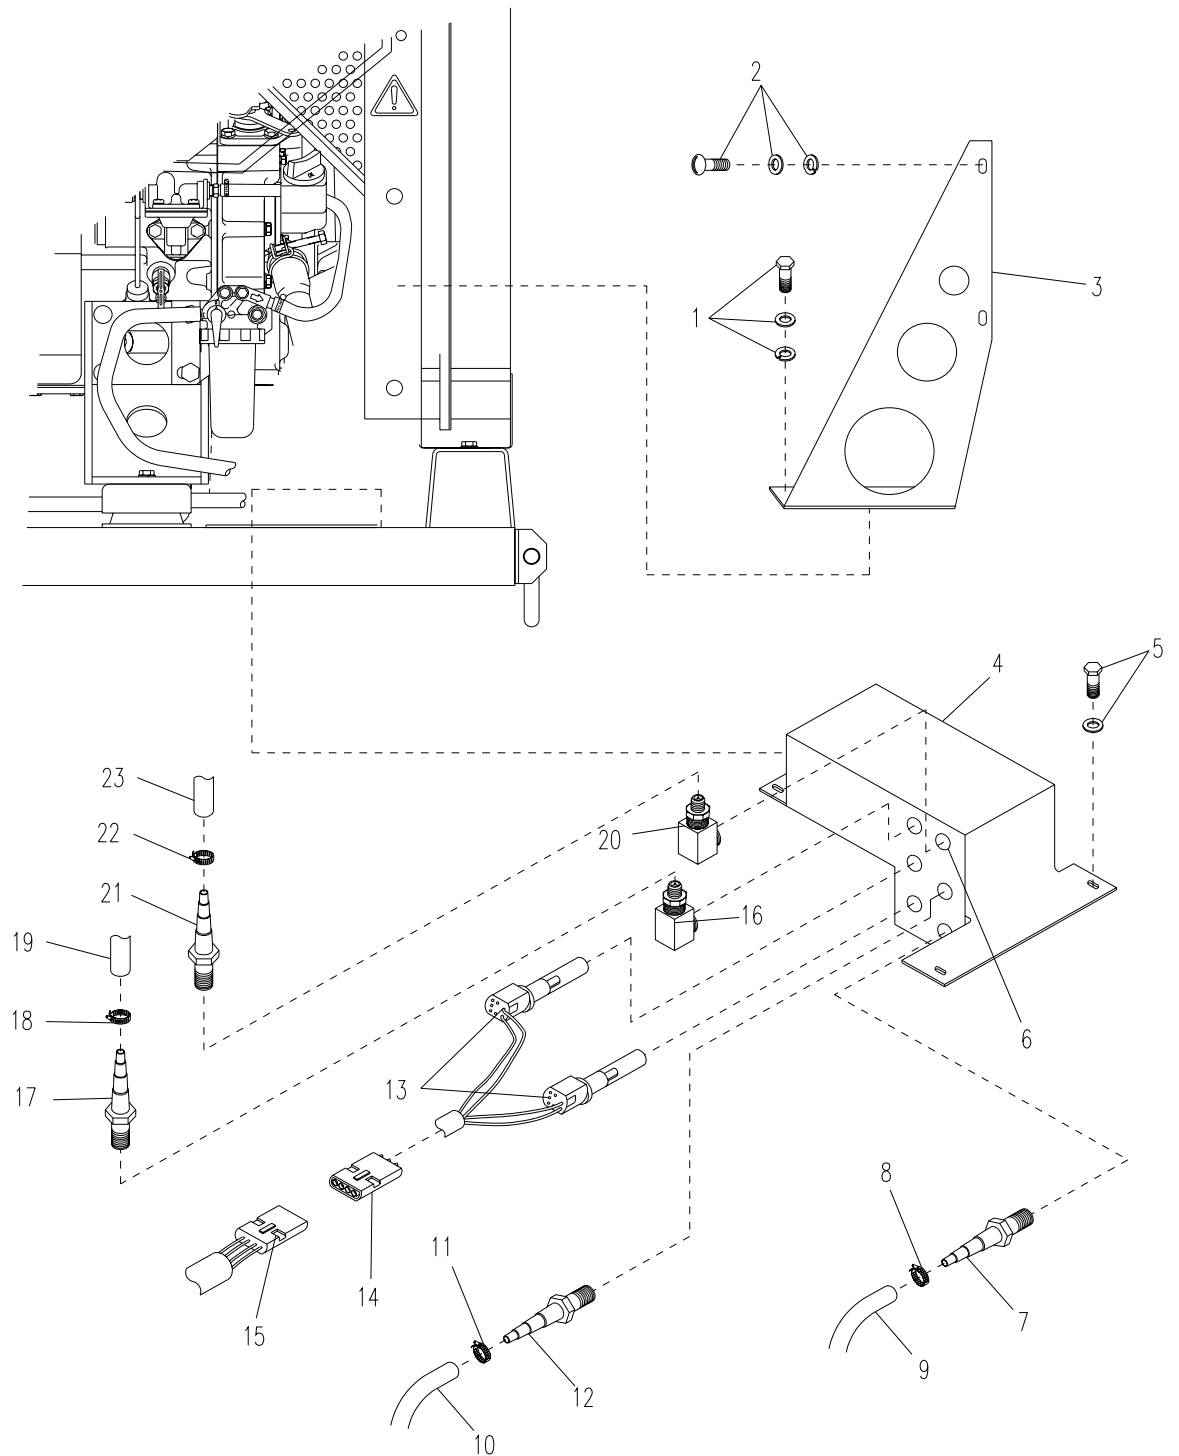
Fuel Day Tank Assembly (SICPS)
